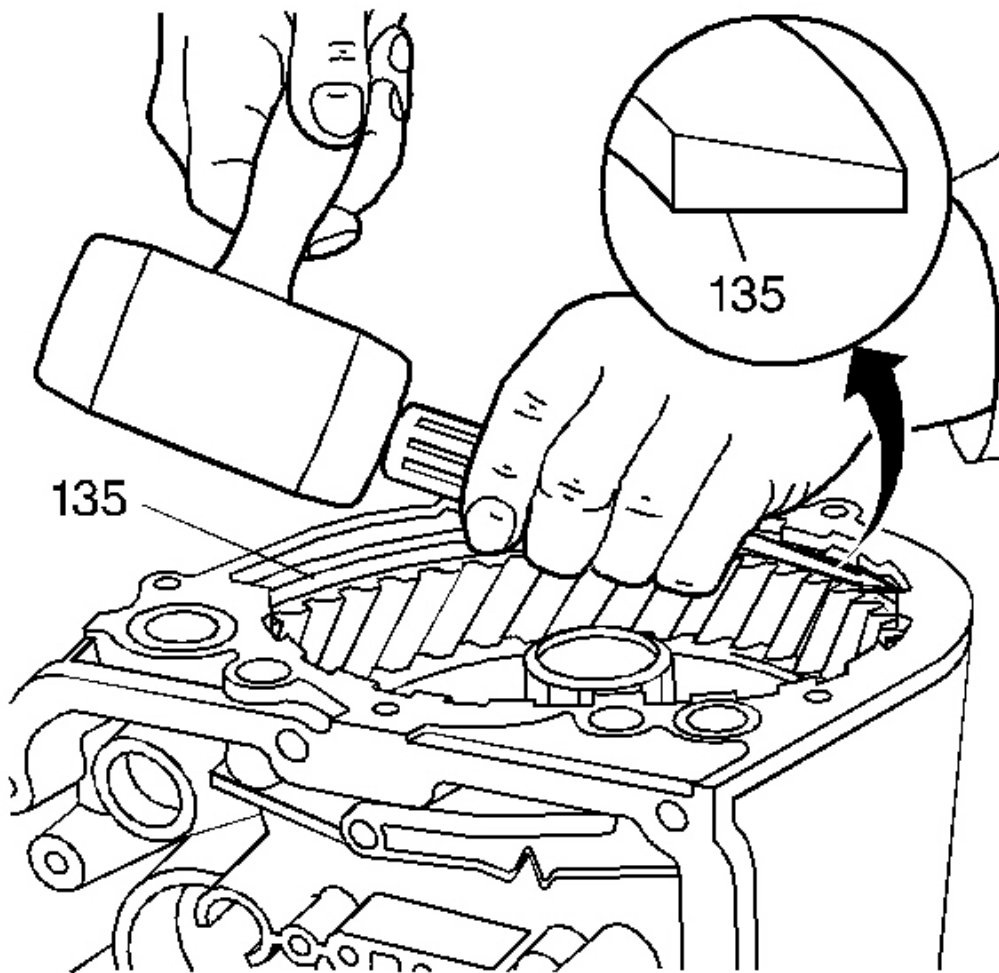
Setting Final Drive Internal Gear Snap Ring With A Punch
